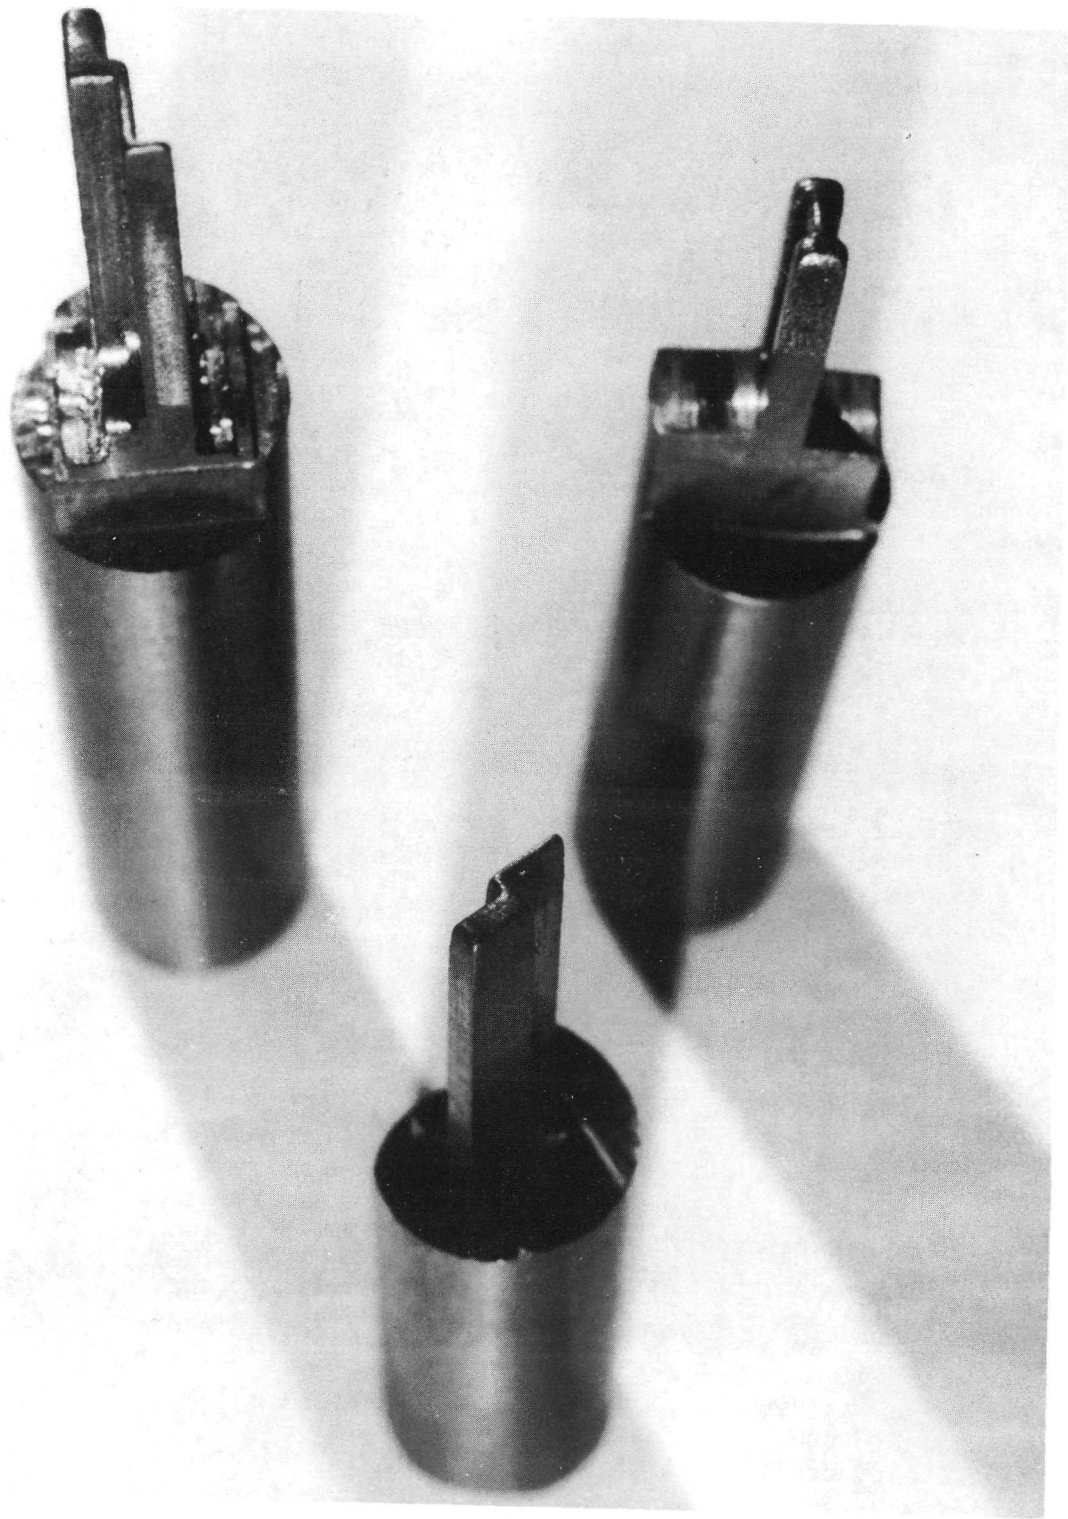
Electrical Discharge Machining Tools for Single Probe Design
